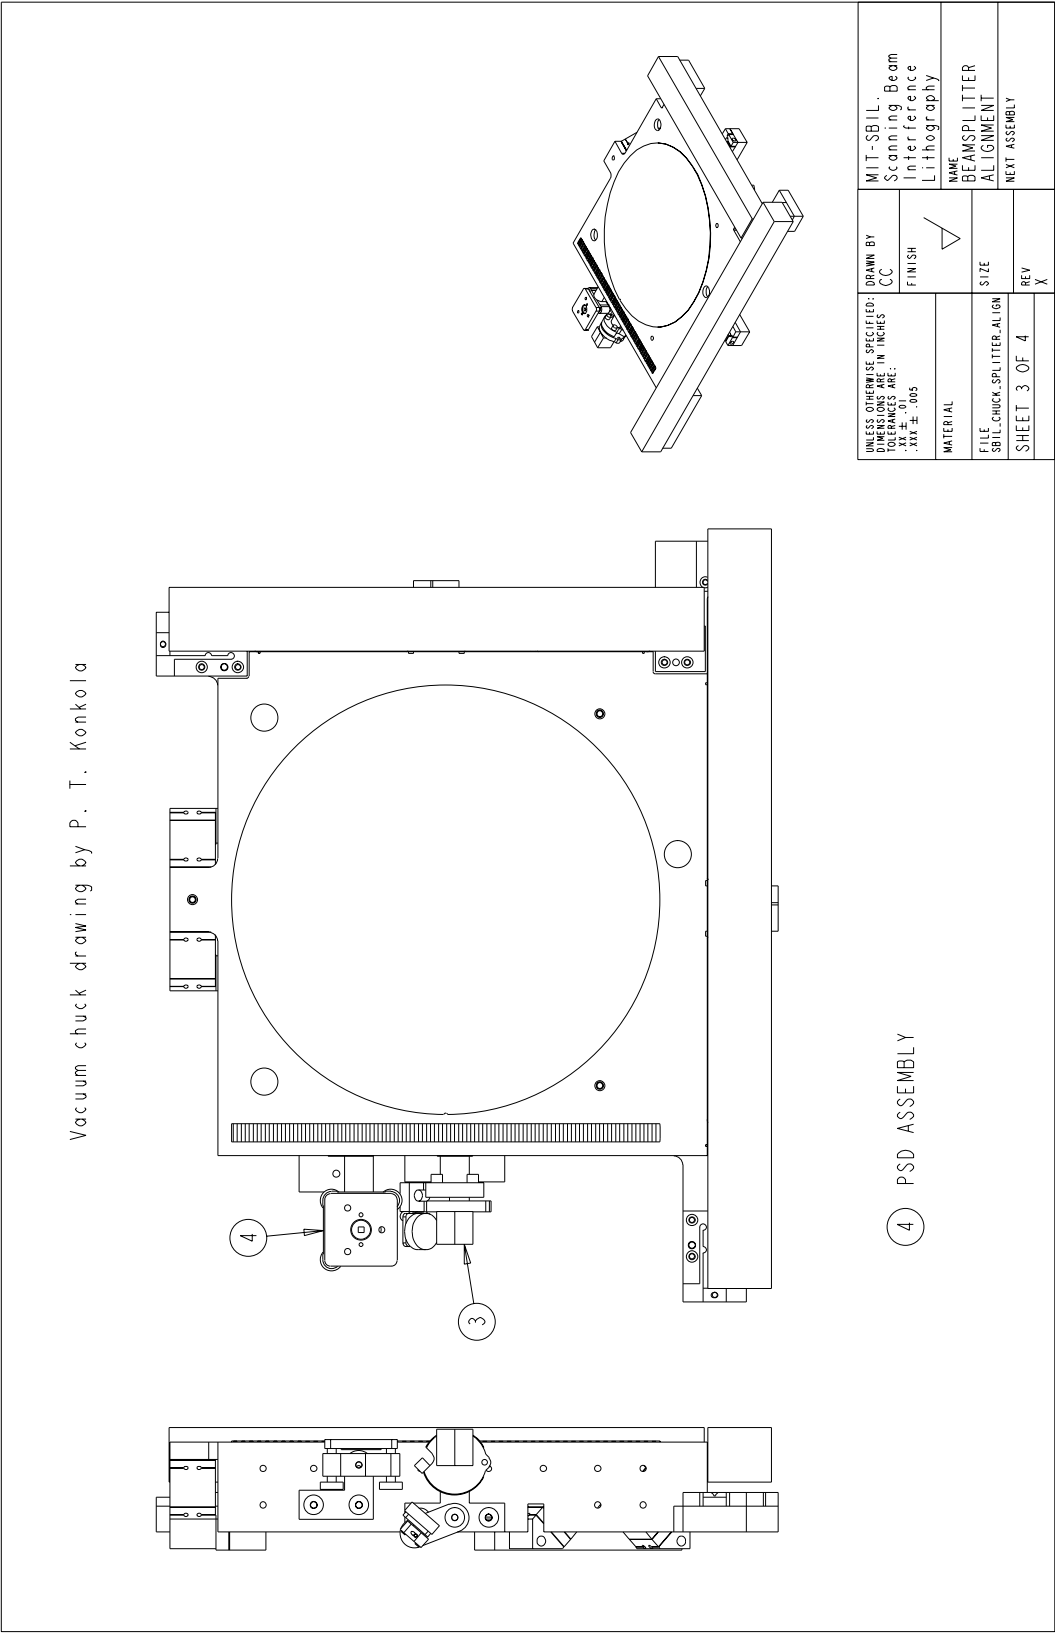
Drawing of the rectangular beamsplitter and the beam overlapping PSD assembled to the vacuum chuck.
